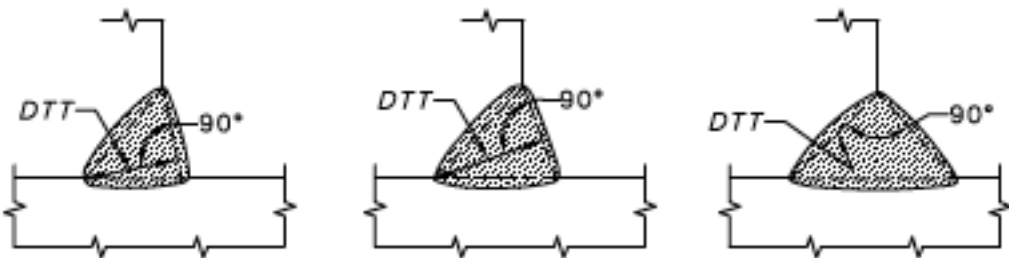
DESIGN THROAT THICKNESS OF COMPOUND WELDS WITH INCOMPLETE PENETRATION WELDS
